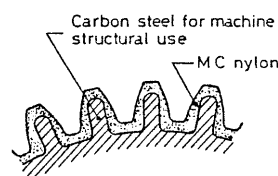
Nylon gear which includes a stiffener of steel in the core of tooth
